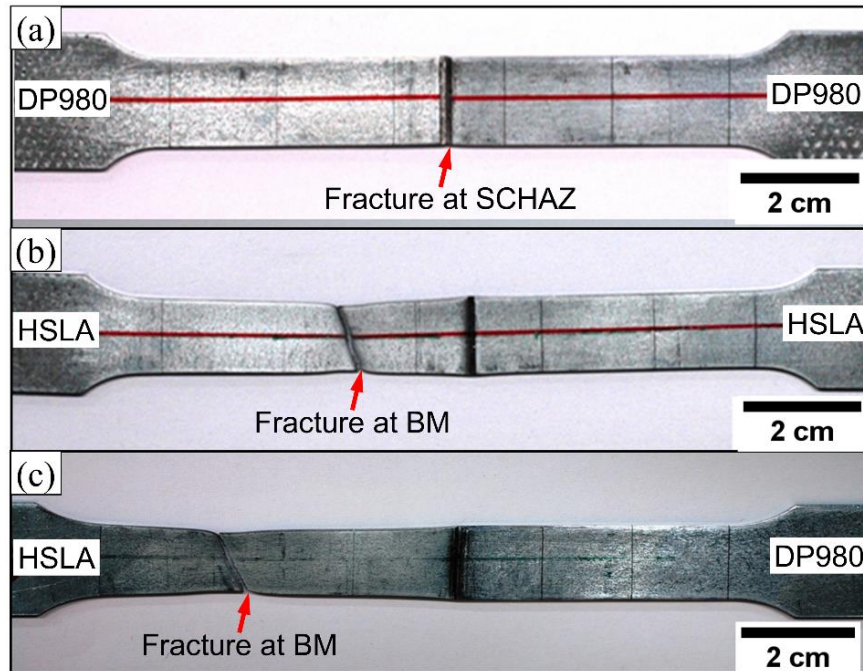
Typical tensile fractured locations of the fiber laser welded joints: (a) DP980-DP980, (b) HSLA-HSLA, and (c) dissimilar weld (HSLA-DP980), all of the samples are produced using power: 6 kW and speed: 16 m/min [98]
